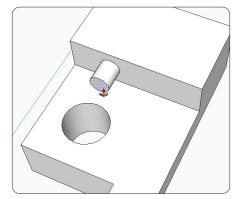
Using the Push/Pull Tool with the circles to create a hole and a dowel.
